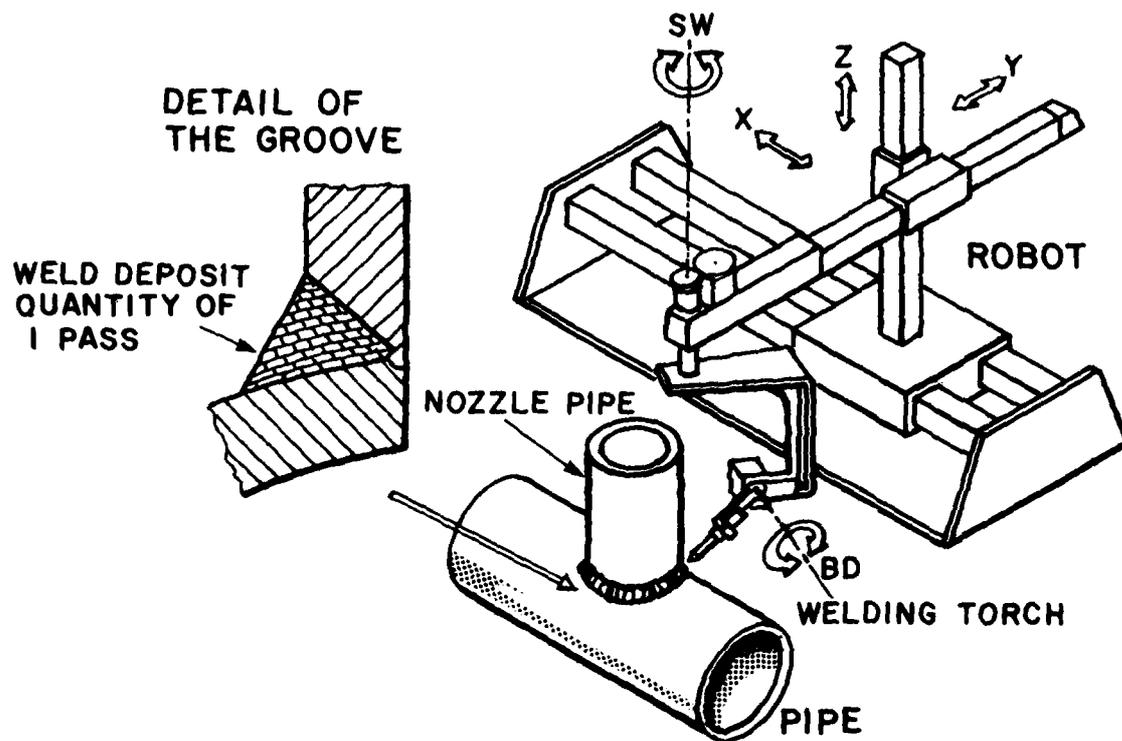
A robot capable of multipass welding of a nozzle to a tube⁽⁹⁾
